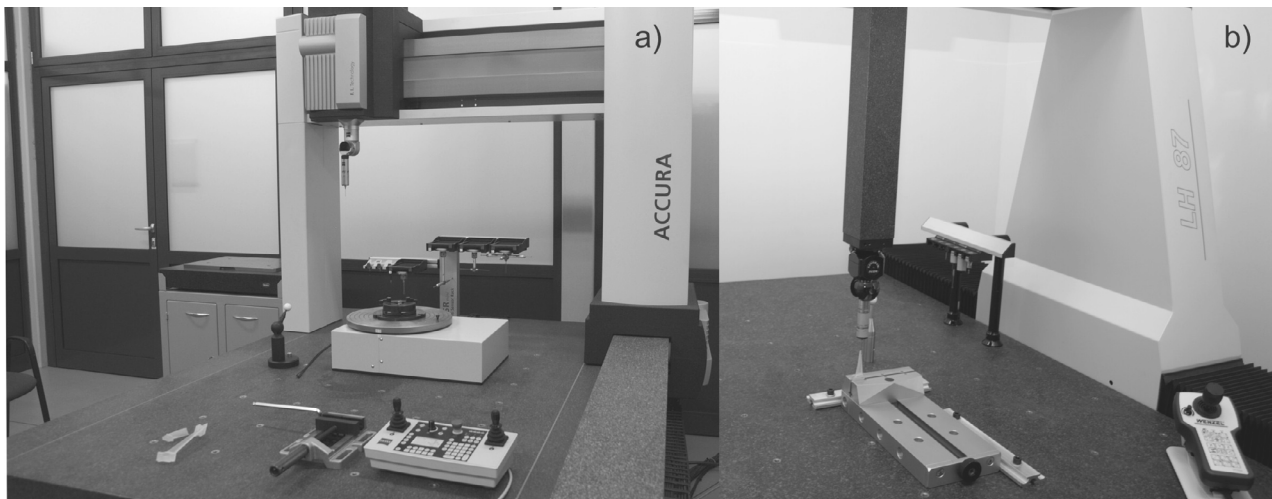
Coordinate measuring machine: a) ZEISS ACCURA, b) WENZEL LH 87
